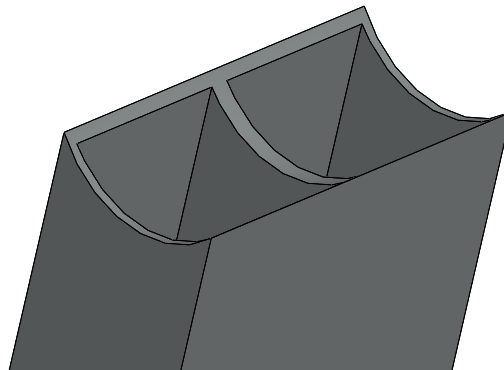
Radius added to the top of the frame body to allow for location during welding
